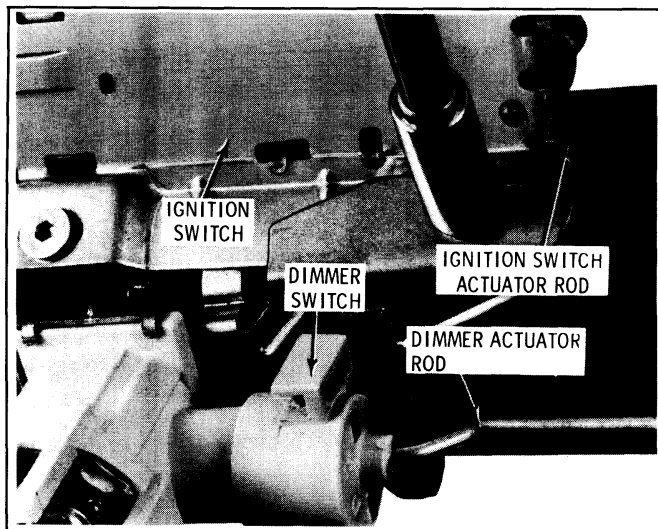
B-102--Removing Ignition and Dimmer Switch - Corvette
